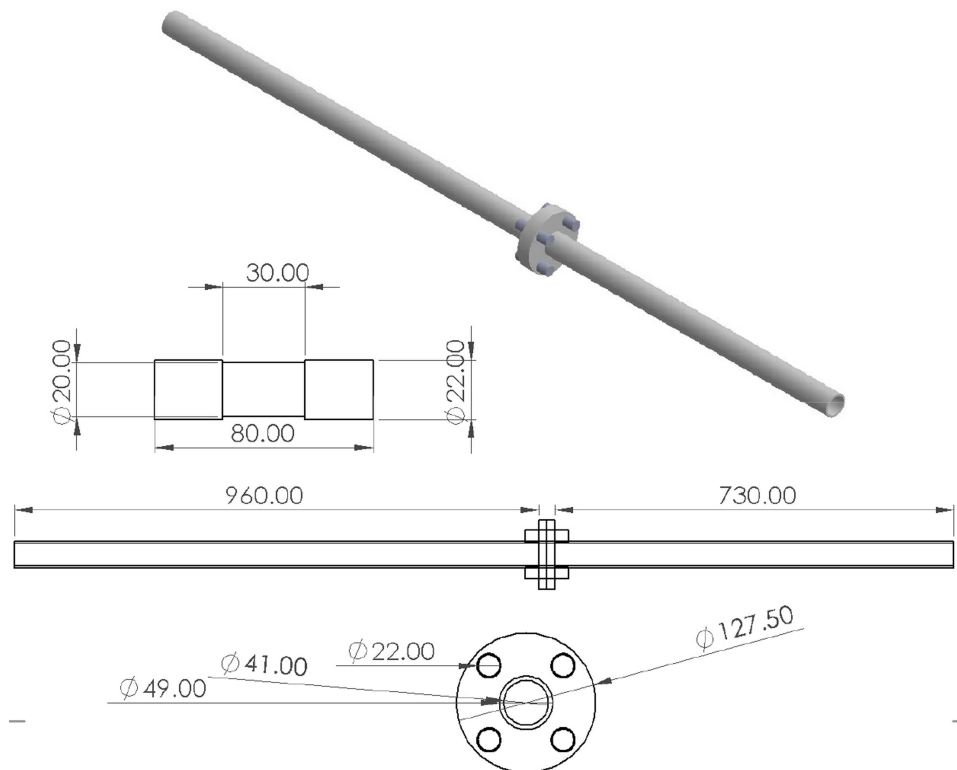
| Geometry of the flanged pipe (dimensions in millimeters).
